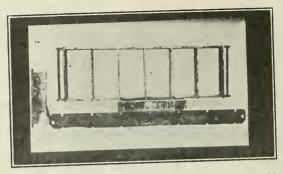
Showing the construction of the open-slip mould, the slotted side piece with holes drilled for hand holds, a web, and a complete mould.
